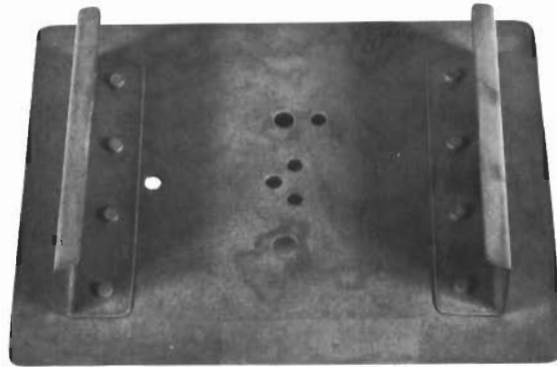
4000°F TEST SPECIMEN - 1.5 INCH RADIUS LEADING EDGE KEY BLOCK DESIGN
